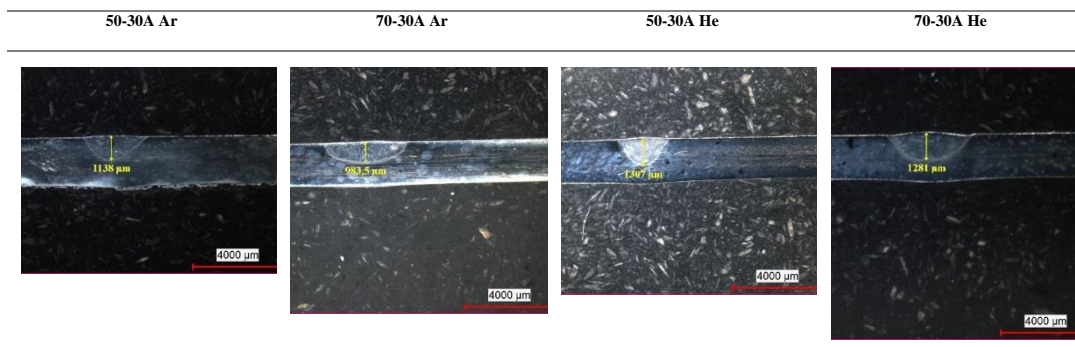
Cross sectional profiles of PCTIG welds
